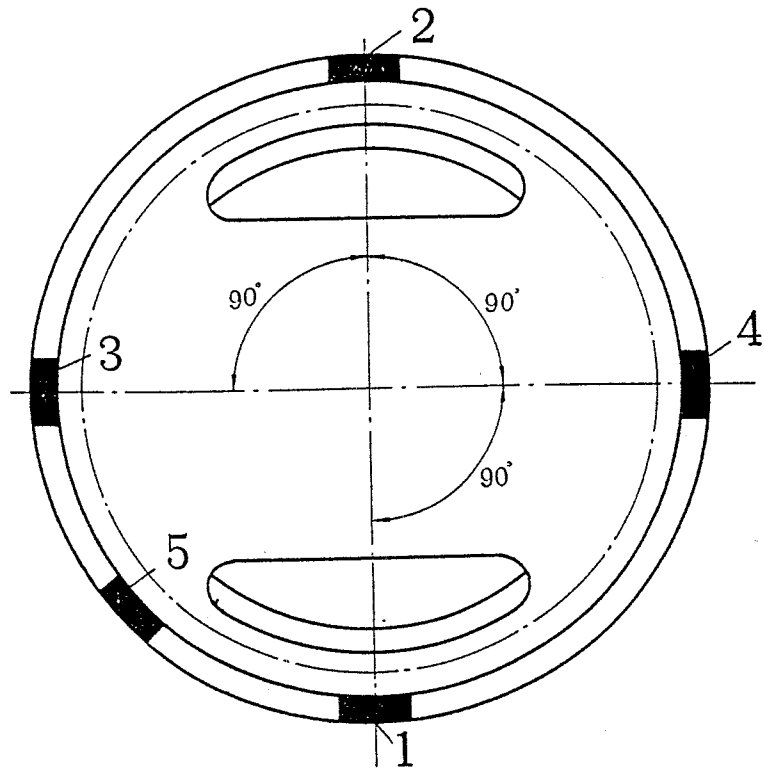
Scheme of Piston Ring Notch Position of Type-6A Piston Engine
